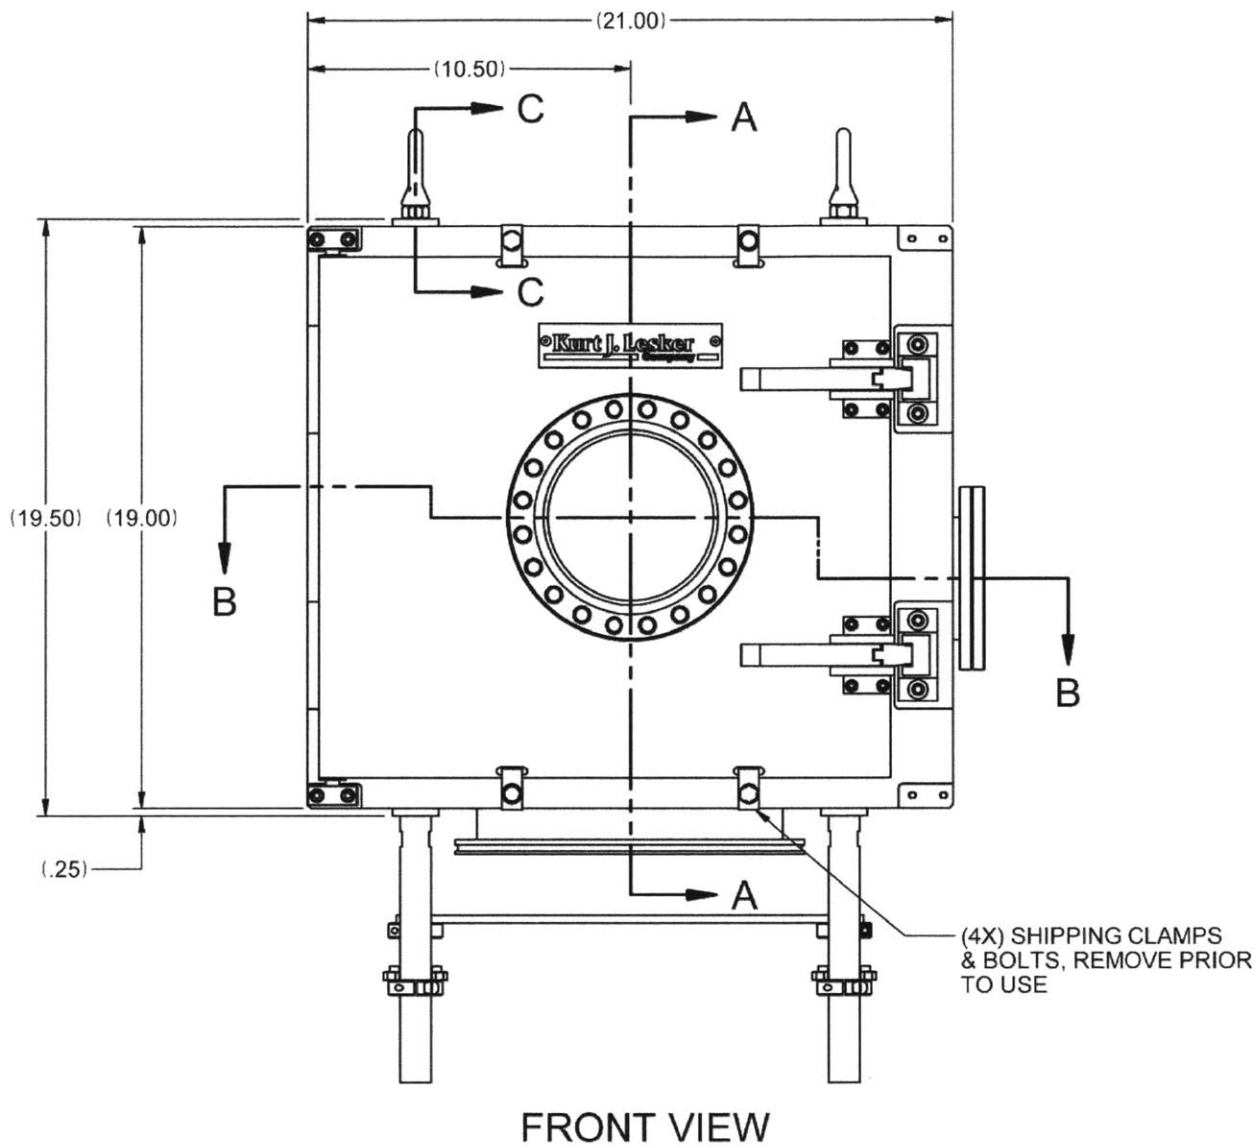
oCVD reactor chamber engineering drawing—front view. Dimensions in inches.
